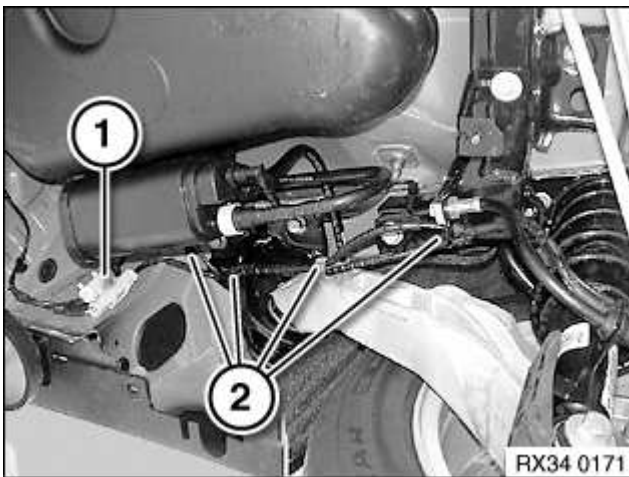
Identifying Brake Pad Sensor Plug Connection And Holders
